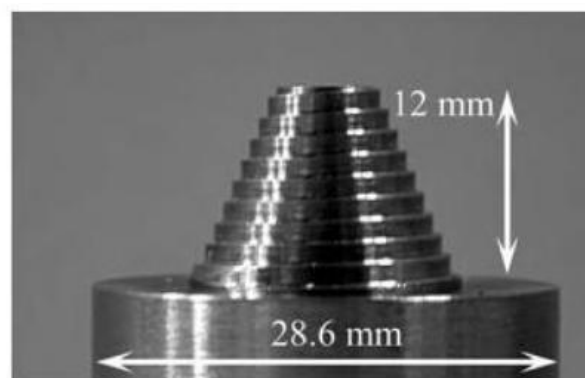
Photograph of a stepped spiral pin tool [6]
